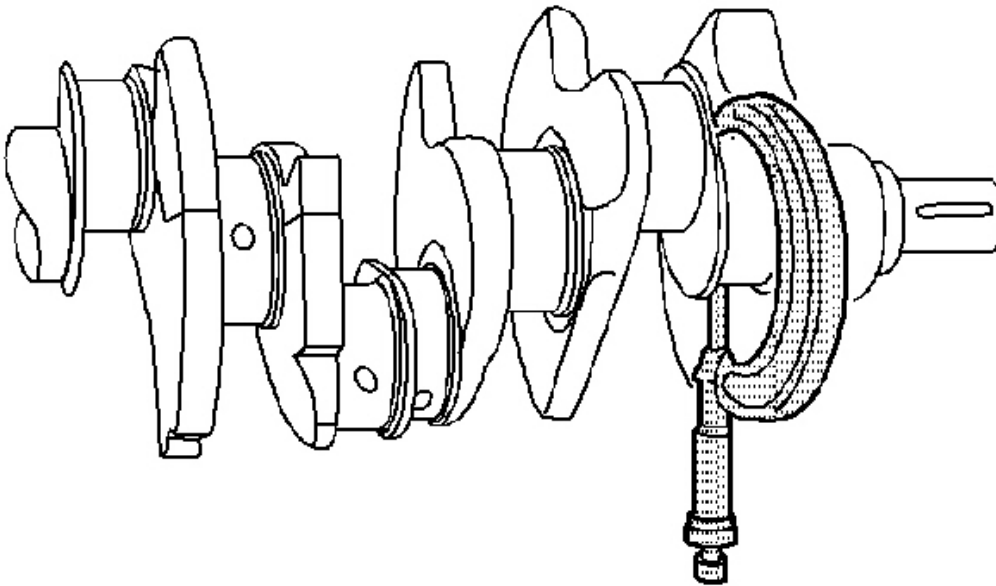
Measuring Crankshaft Bearing Journal Taper & Runout
